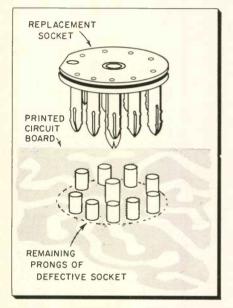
Trimming the plastic around a broken printed circuit socket prepares it for easy replacement fitting. See text.
